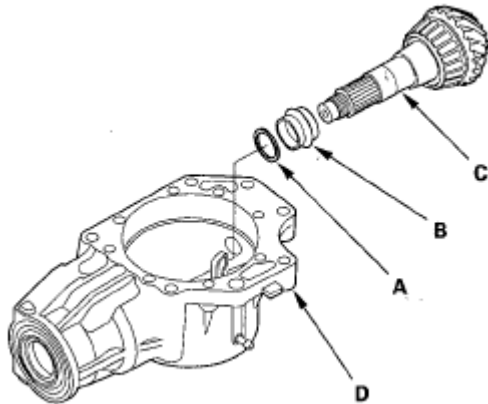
Identifying Thrust Washer, Transfer Spacer And Transfer Output Shaft (Hypoid Gear)
